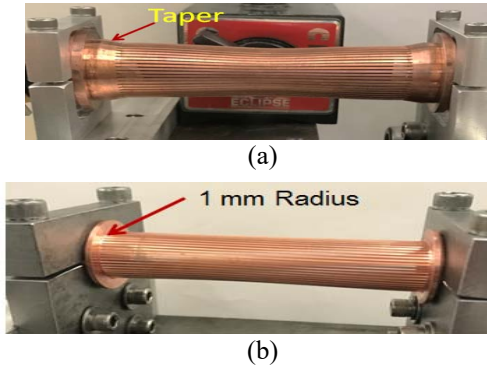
Test setup for the RF finger spools, (a) CuCrZr spool with aluminium clamping fixtures, (b) Glidcop spool with steel clamping fixtures.
